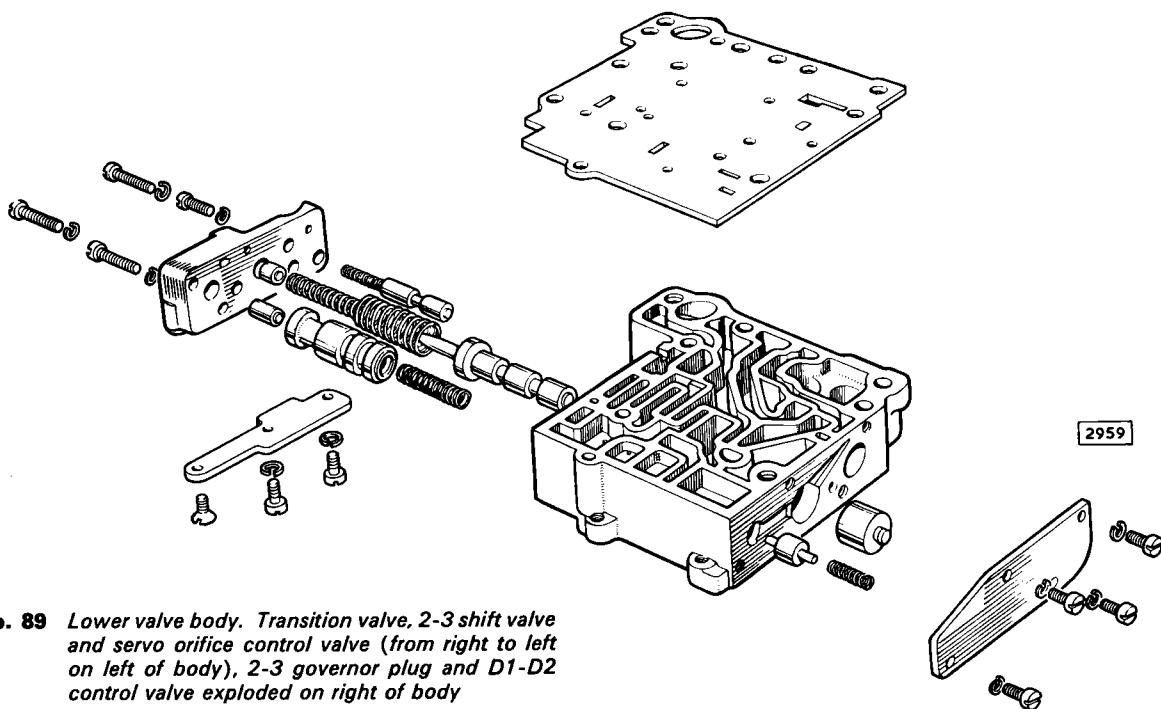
Lower valve body. Transition valve, 2-3 shift valve and servo orifice control valve (from right to left on left of body), 2-3 governor plug and D1-D2 control valve exploded on right of body
